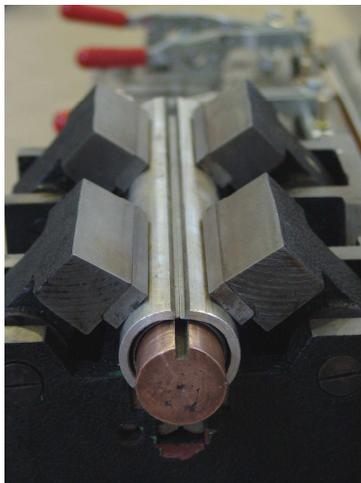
Photograph of a stabilizing device for tight fixing of a tube and the work of laser beam in the process of laser welding [8]
